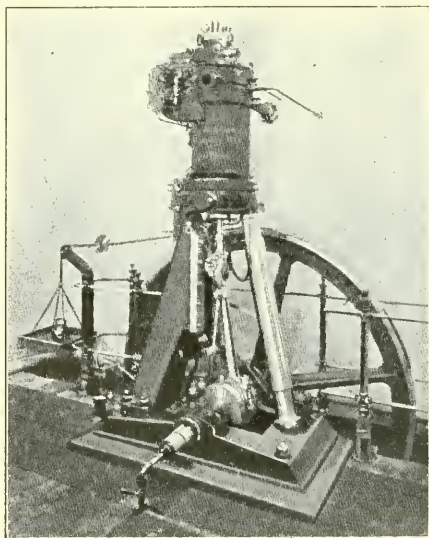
THIRD DIESEL ENGINE BUILT. VIEW SHOWS TESTING BRAKE
